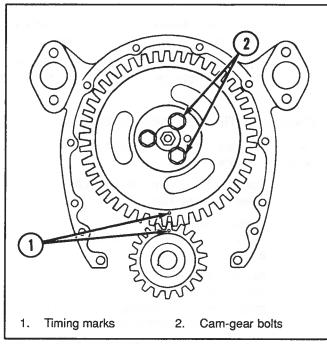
Timing-Gear Alignment Marks – Right-Hand Rotation
